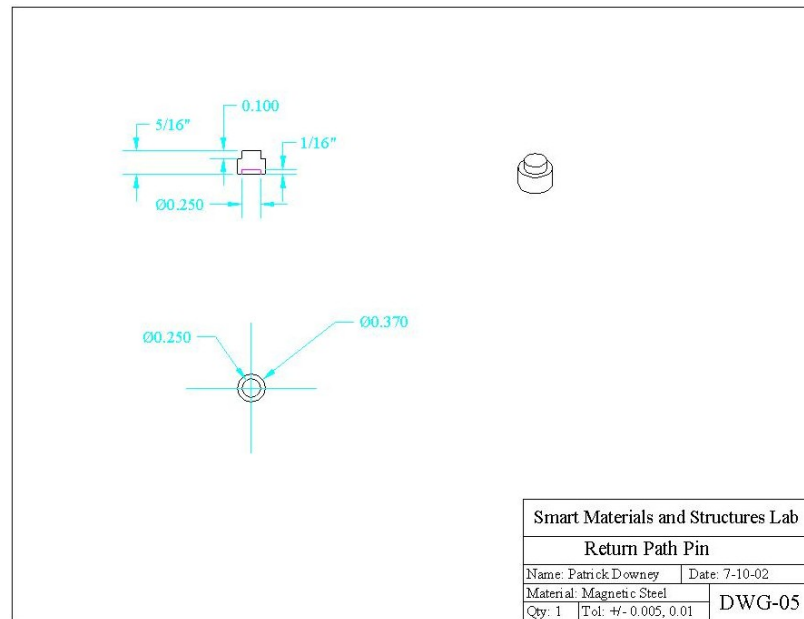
Mechanical drawing of a magnetic circuit steel piece.
